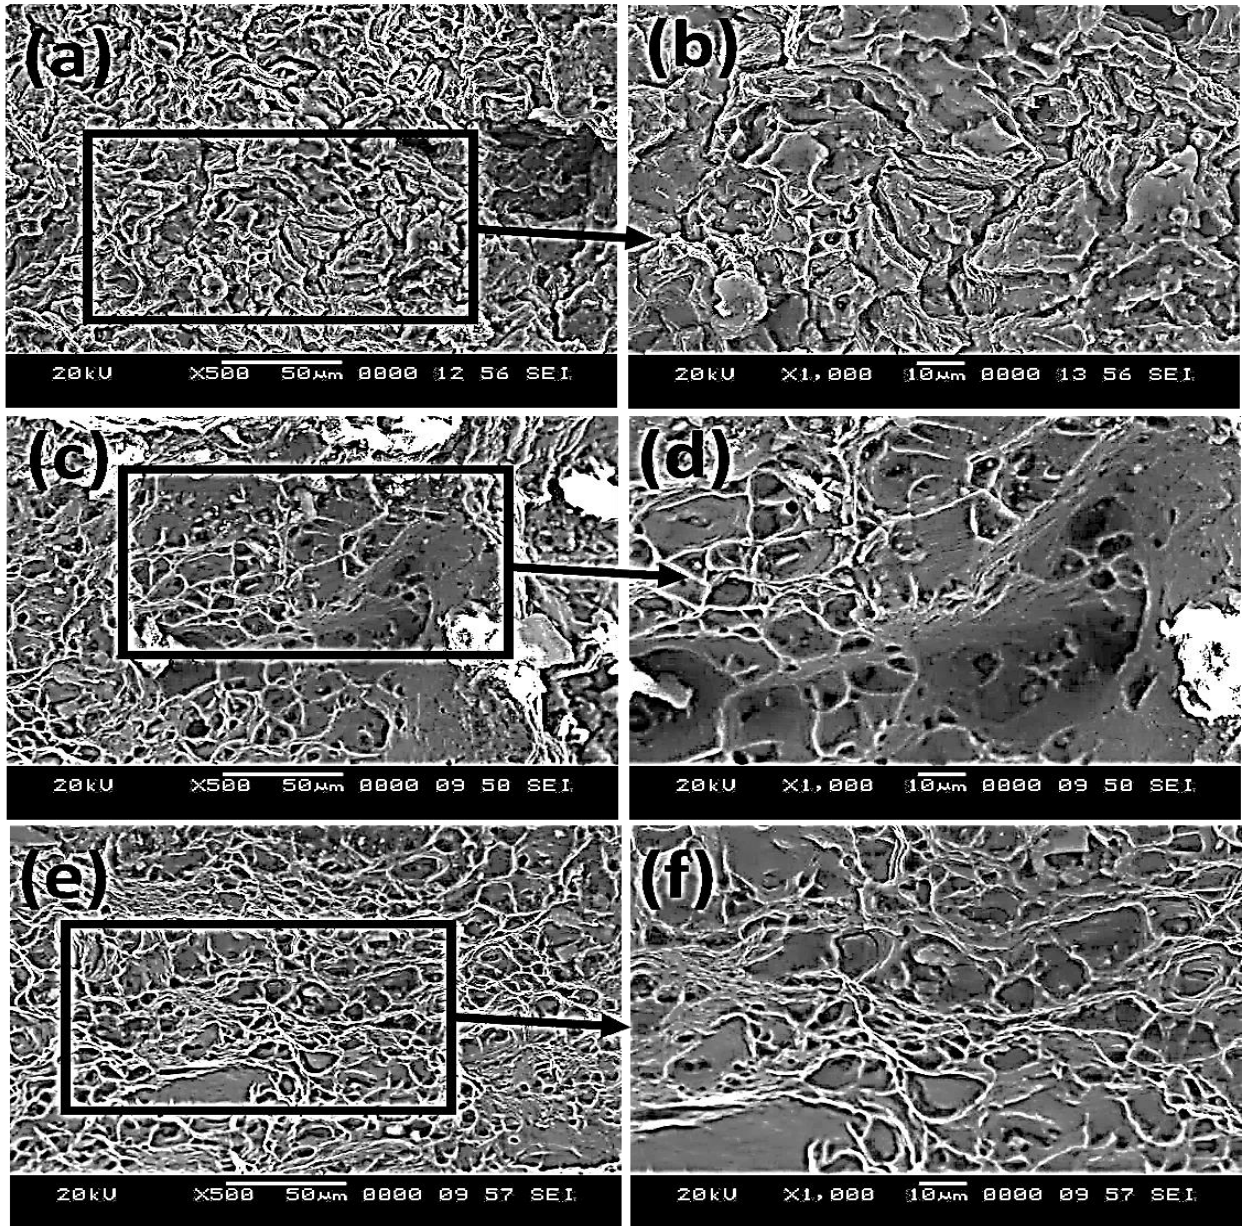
SEM images of fractured surfaces of the CMT welded A5754-H111 and A5083-H111 joint using ER4043 filler wire: (a-b) A6061 interface; (c-d) A6082 interface and (e-f) Over all weld region
